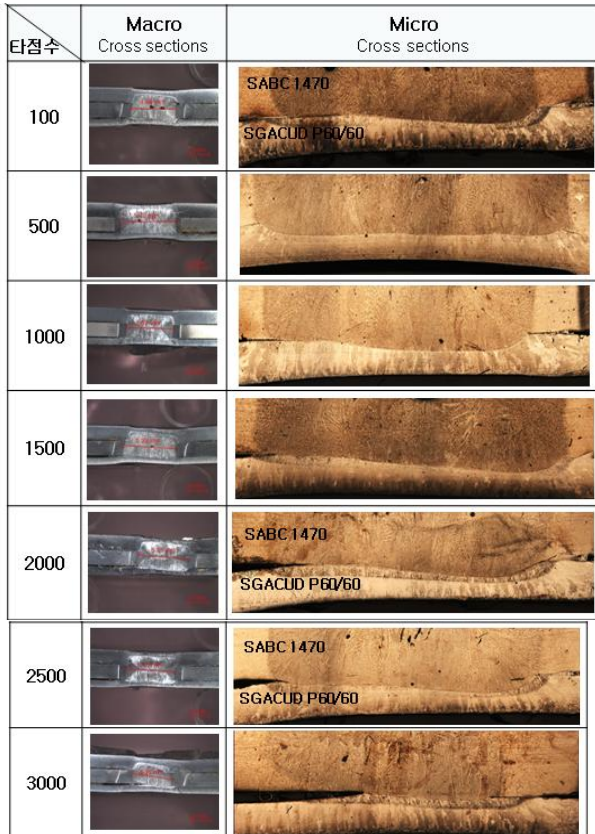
Macrograph of cross section for resistance spot weld three sheet combination steels.
